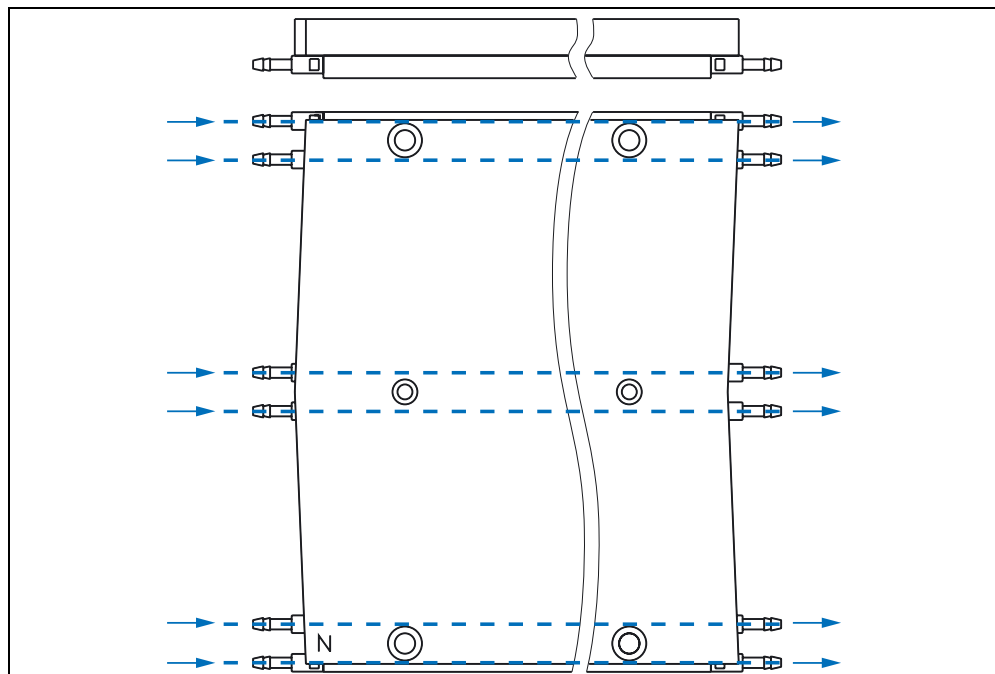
Secondary section cooling consisting of cooling sections with hose connector nipples for 1FN600...900 motor models (side and top view)
